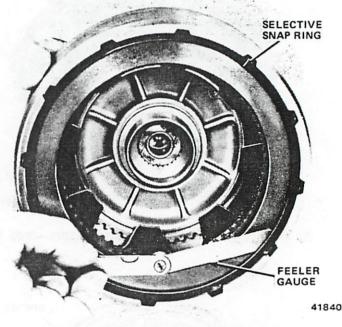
C-79 Measuring Rear Clutch Pack Clearance
